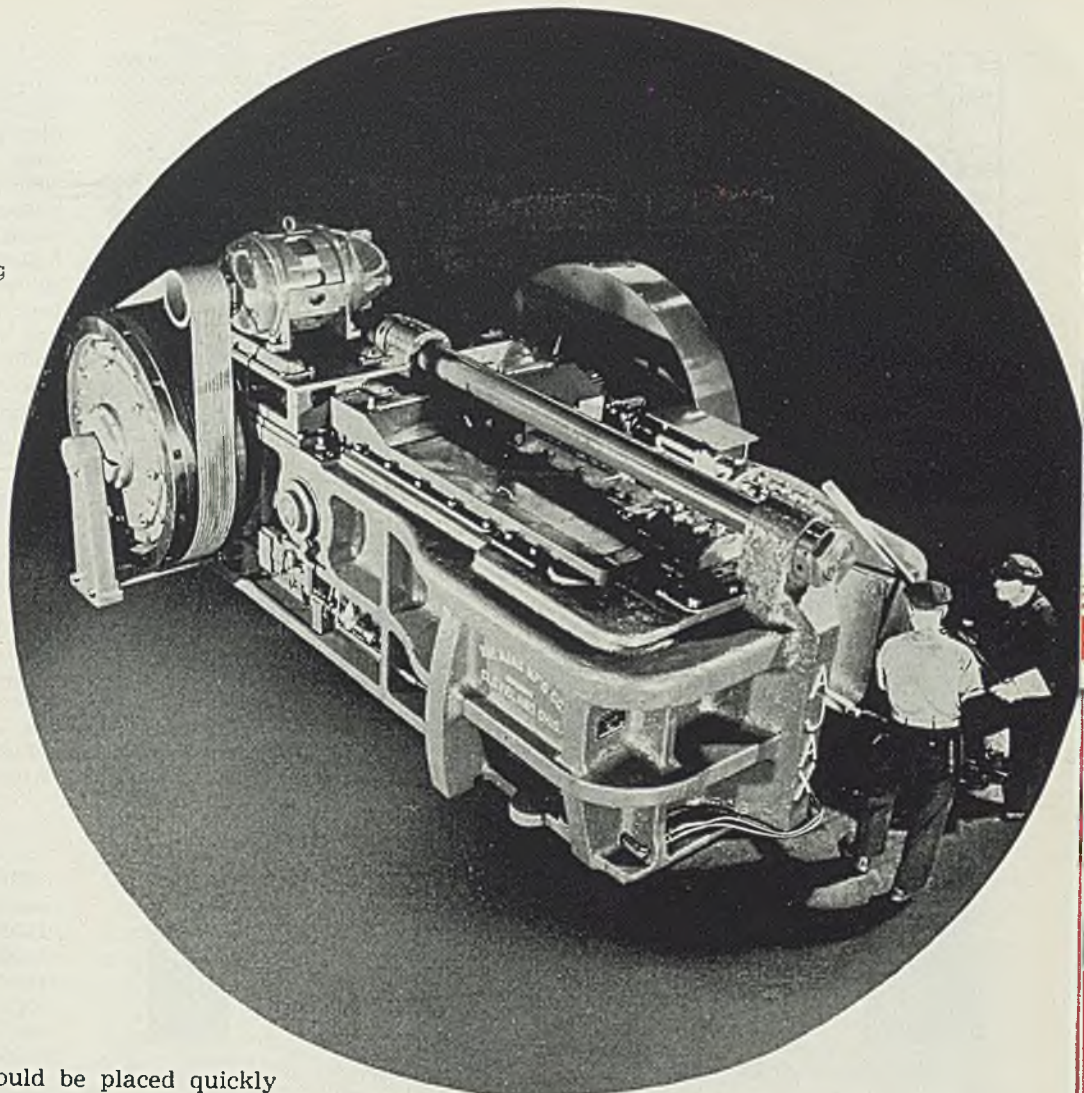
Upsetting type of shell forging machines is noted for its massive construction. This unit made by Ajax Mfg. Co., Cleveland, is typical. Much larger machines than the one shown have been developed and are now used to forge bars up to 9 inches in diameter
